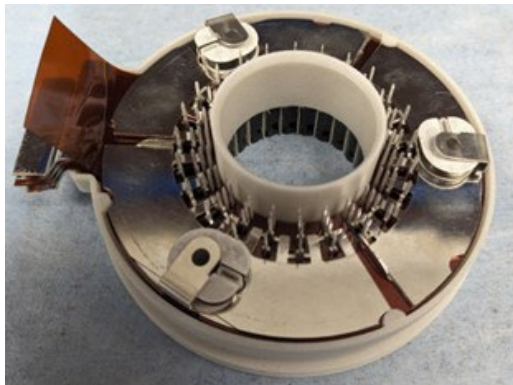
Assembled power stage with 24 MOSFETs
